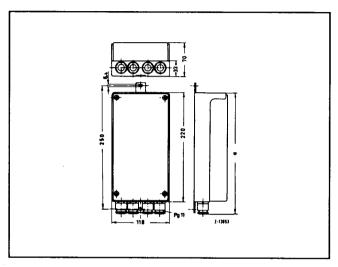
Dimensional drawing of the field case IP 54 (dimensions in mm)
